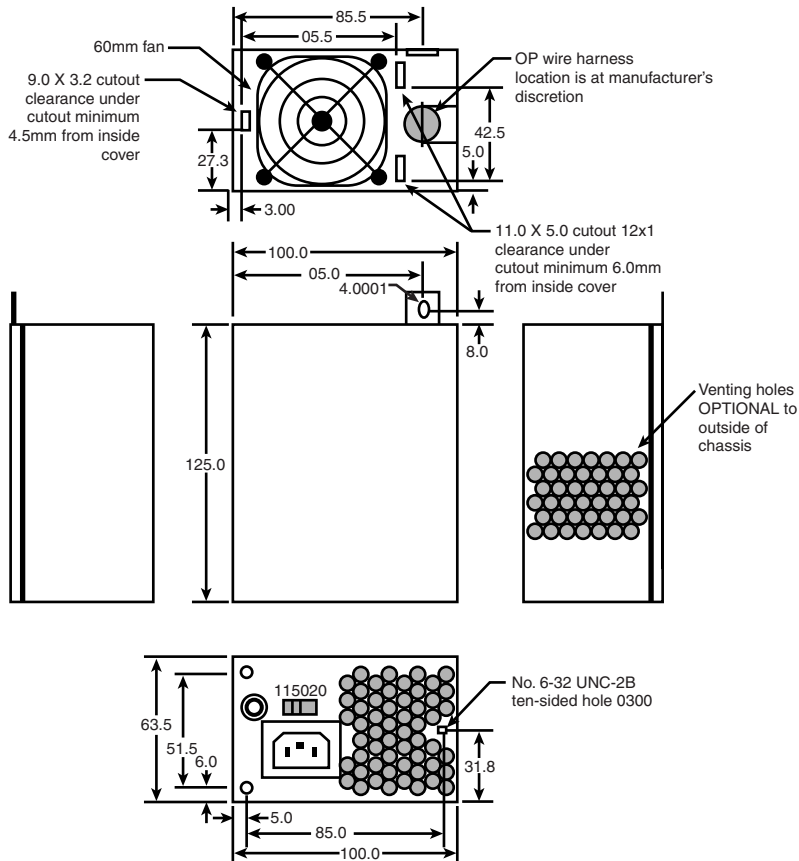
SFX form factor power supply dimensions with a standard internal 60mm fan.
